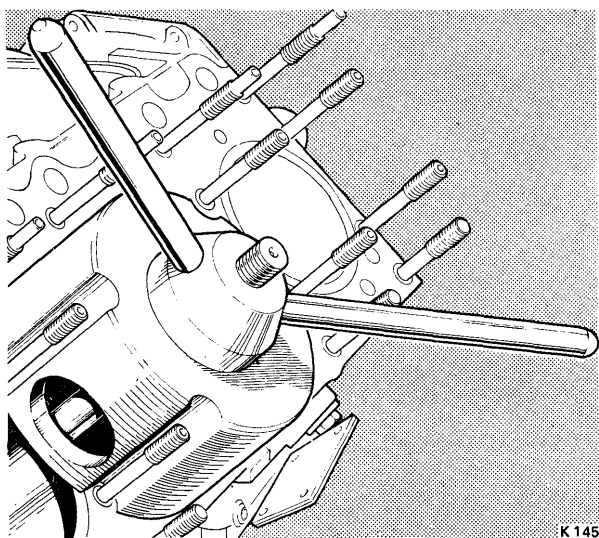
METHOD OF REMOVING CYLINDER LINERS
